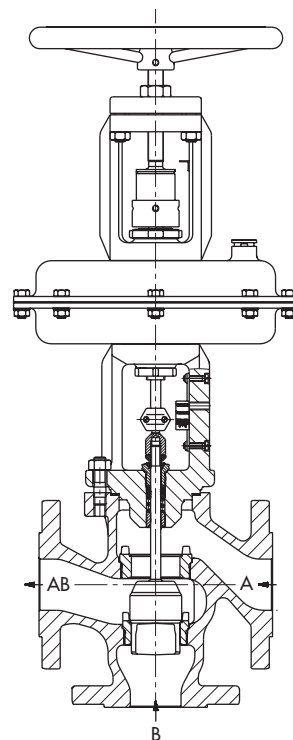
· Type 3244-1 Pneumatic Control Valve with Type 3244 Three-way Valve (plug arrangement for mixing service (DN 15 to 25 for flow-diverting service as well) and Type 3271 Actuator with additional handwheel
